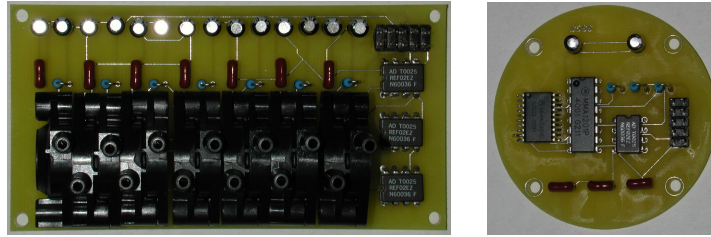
Electronics Example - Pressure Sensor and Accelerometer Boards
